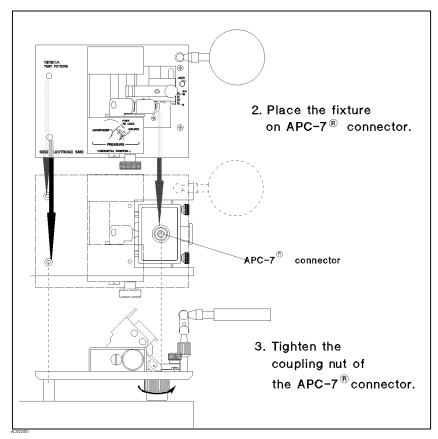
Connecting the Test Fixture with APC-7® Connector (4291B)
